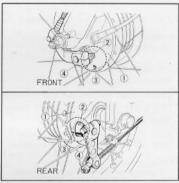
(1) Brake panel (2) Arrow (3) Reference mark (4) Brake
